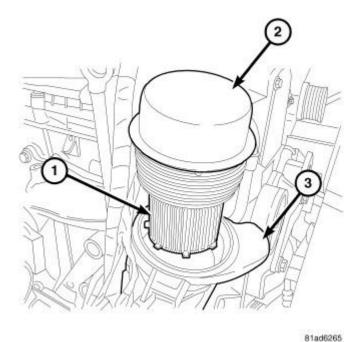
OIL FILTER ADAPTER Courtesy of CHRYSLER LLC
